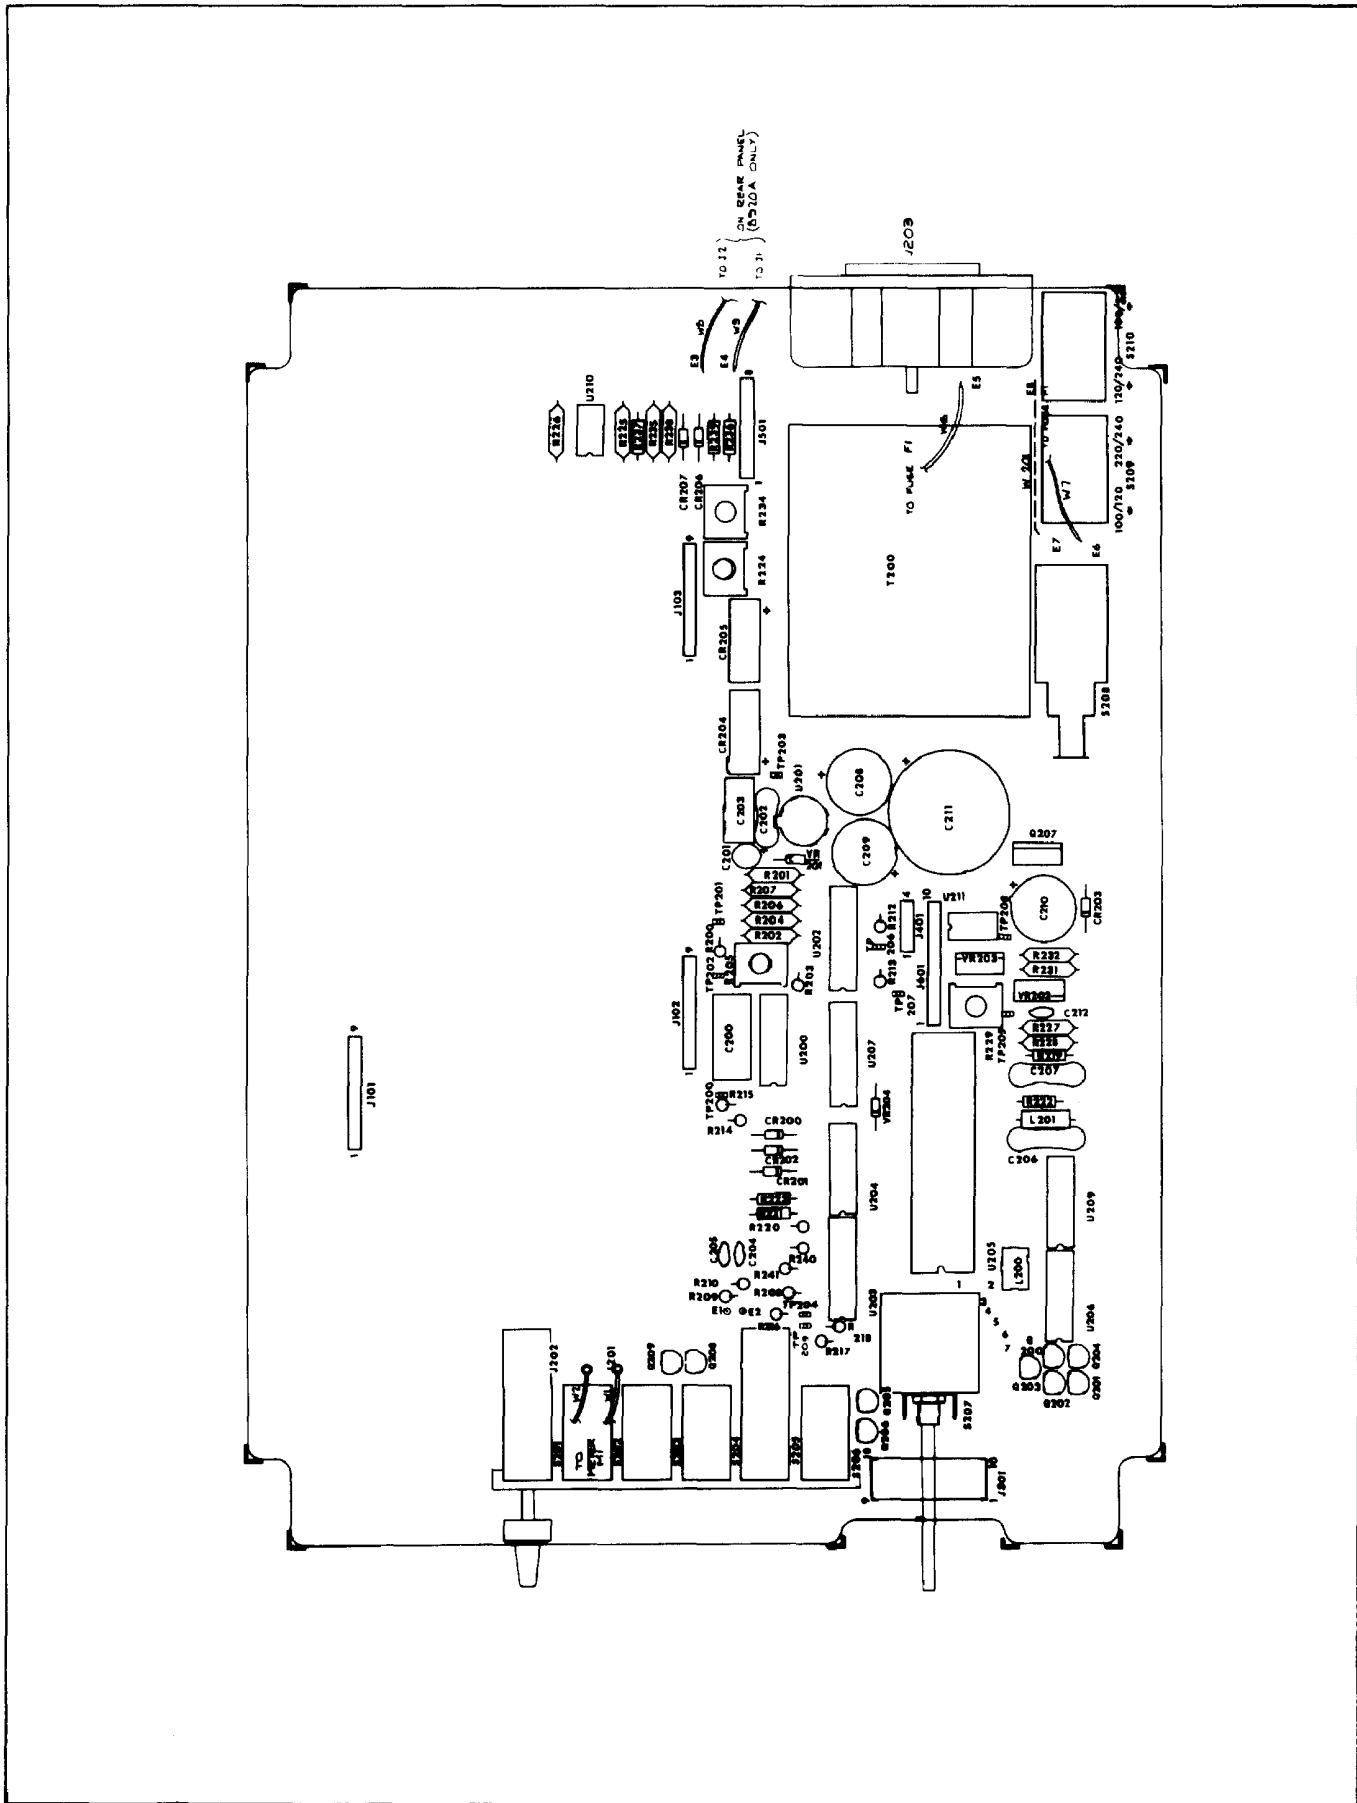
A1 8921A Main PCB Assembly (cont)
